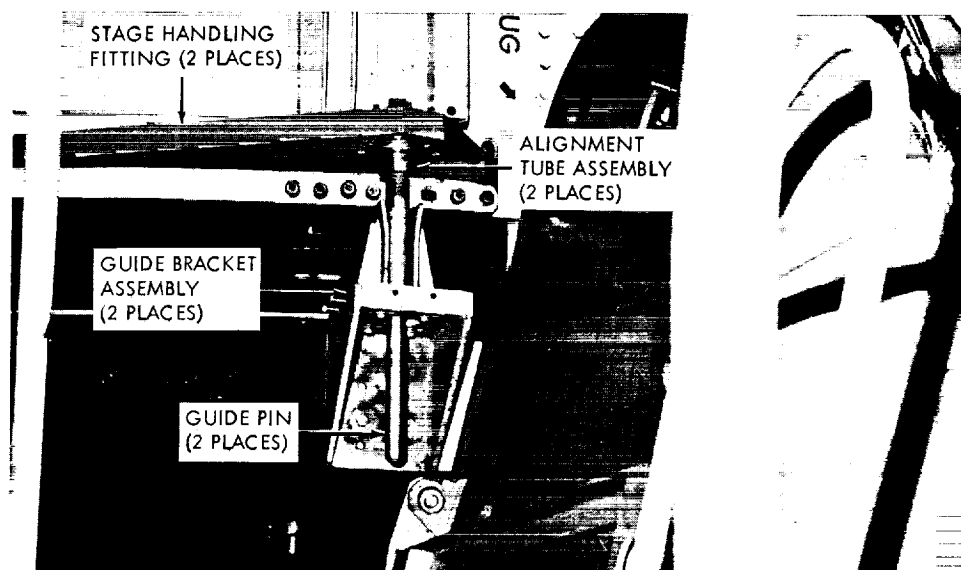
S-IC Stage/Mobile Launcher Alignment Equipment
